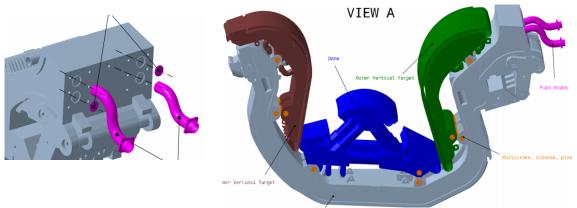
Welding of Customized Cooling Pipes and Complete Standard CA
